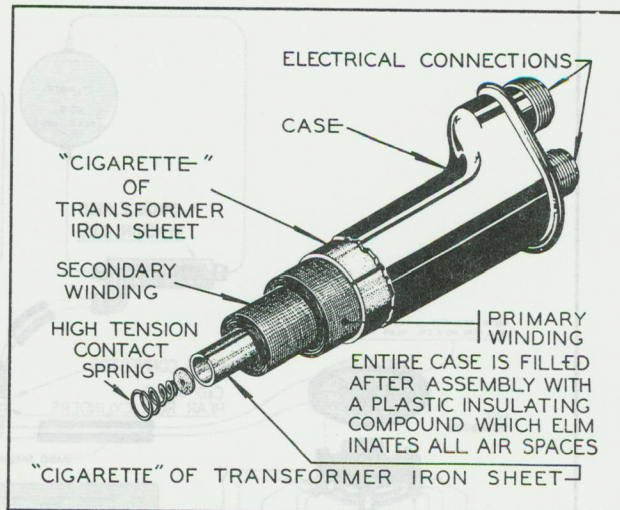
Typical Low Tension Transformer Coil "Telescoped" to Show Design
